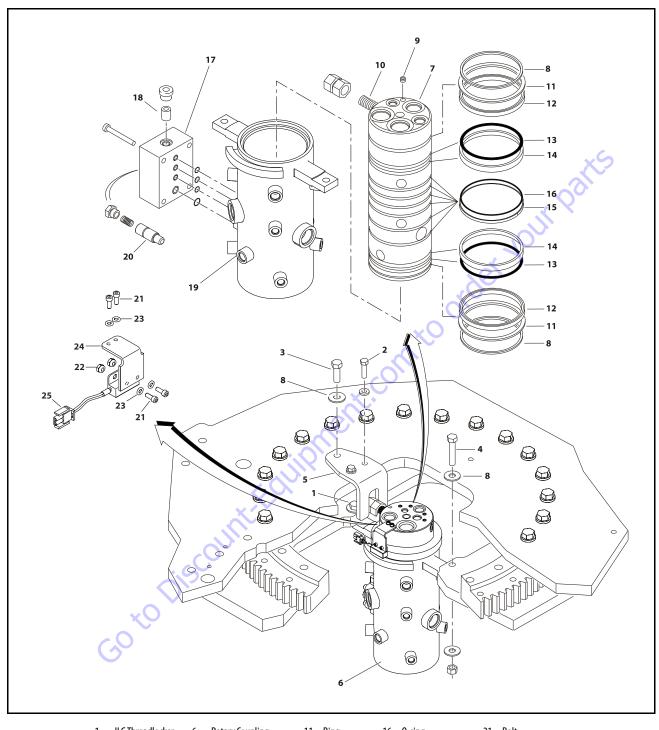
Rotary Coupling (9 Port) - 4WS (USA Built Machines, SN 0300138729 through 0300171769 and China Built Machines, SN B300000100 through B300000969)
